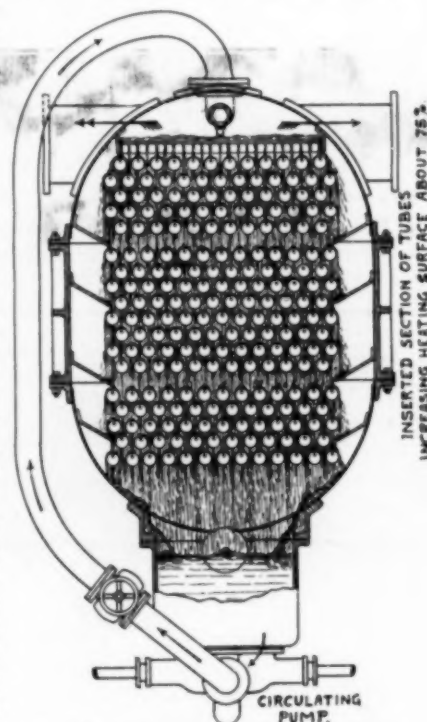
ENLARGING LILLIE EVAPORATOR.
